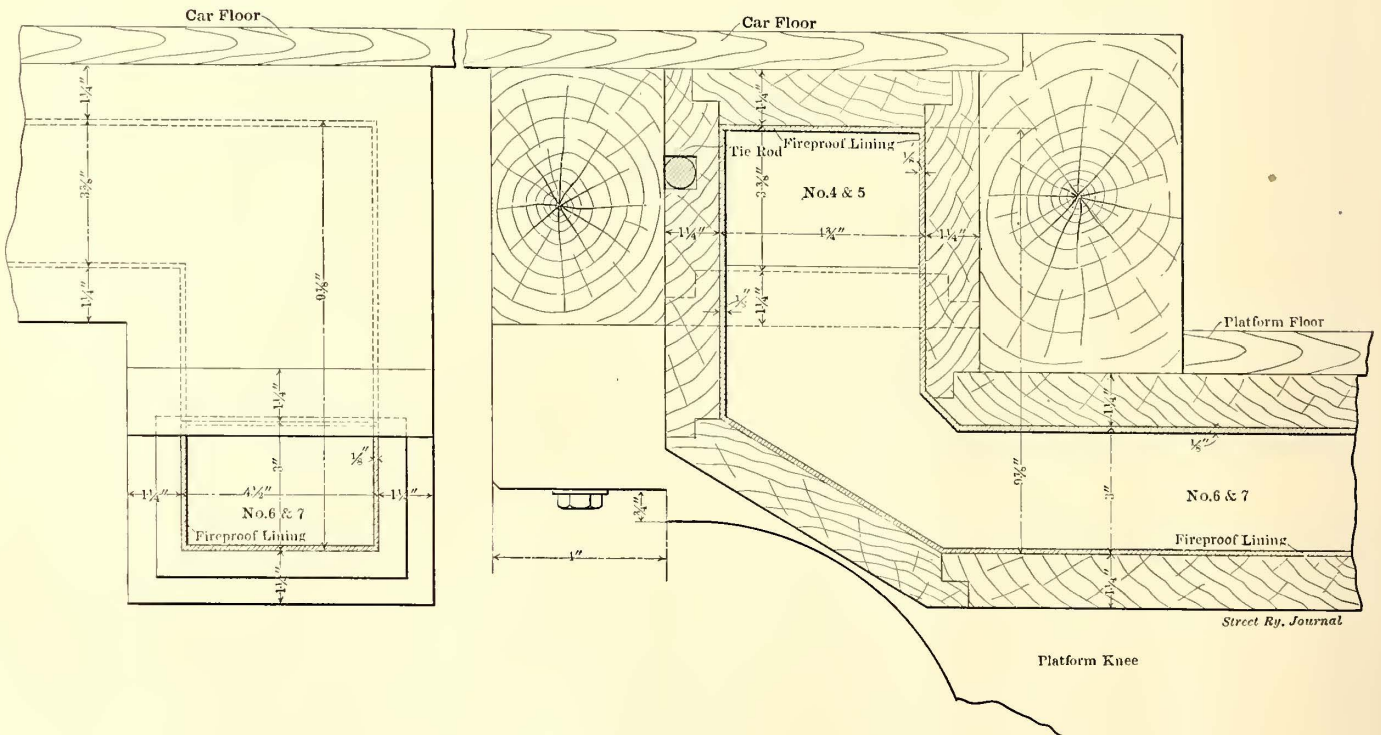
DETAIL SECTIONS OF CABLE BOXES NOS. 4, 5, 6 AND 7, WIRING SCHEME FOR WASHINGTON CAR
